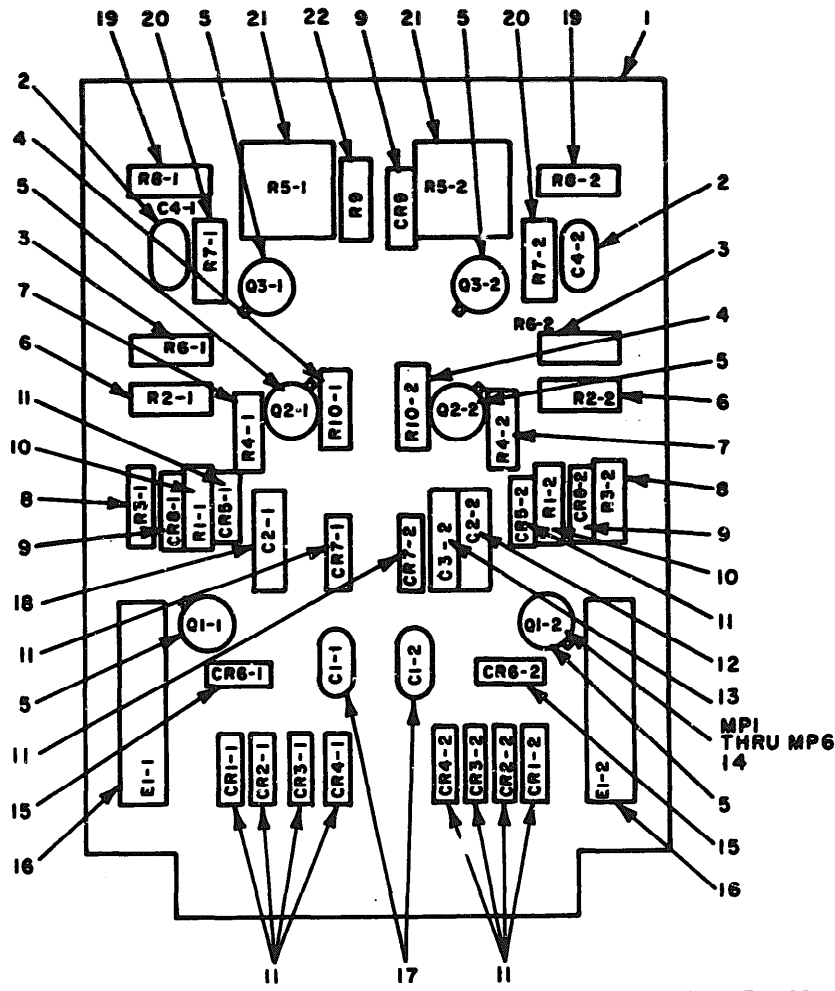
Circuit Card Assembly (SSS1 single-shot) 398-6607-10303.
